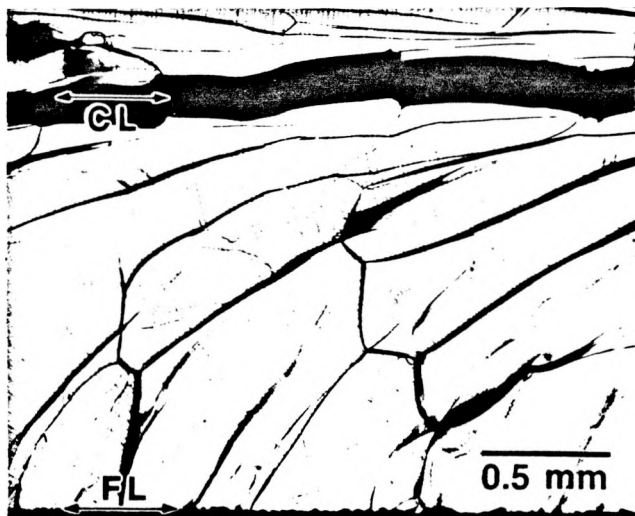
Micrograph of as-welded surface of butt weld in 0.5 mm thick Mo sheet illustrating a centerline crack. CL and FL indicate weld centerline and fusion line, respectively.
